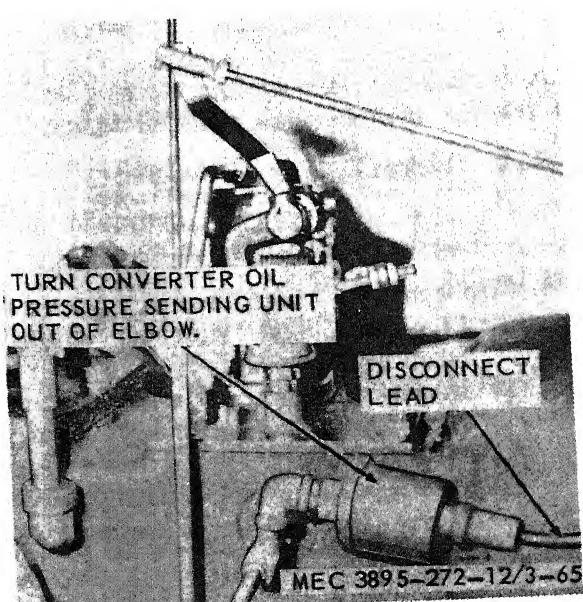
Torque converter oil pressure sending unit, removal and installation.
